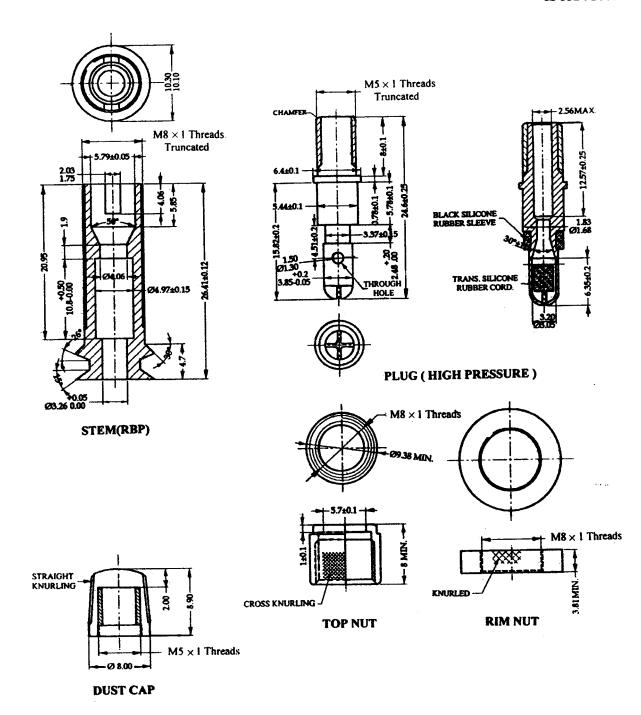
GERMAN VALVE FOR MOULDED TUBE
